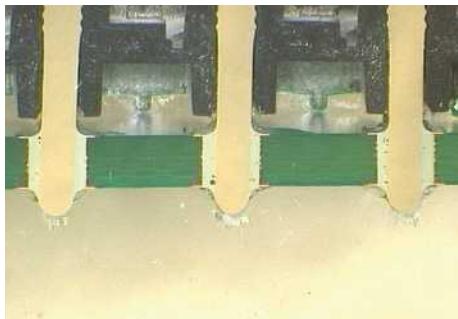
Assessment of the fill level for a 2.6 mm pin in a 1.6 mm thick PCB
